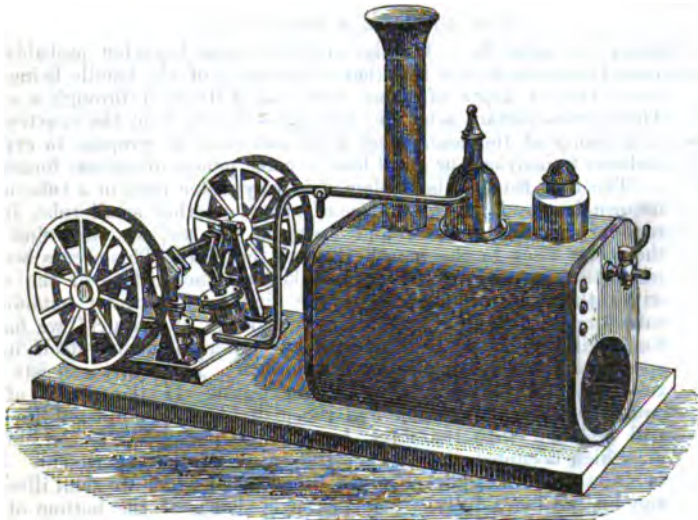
ENGINE FOR PADDLE-BOAT.
